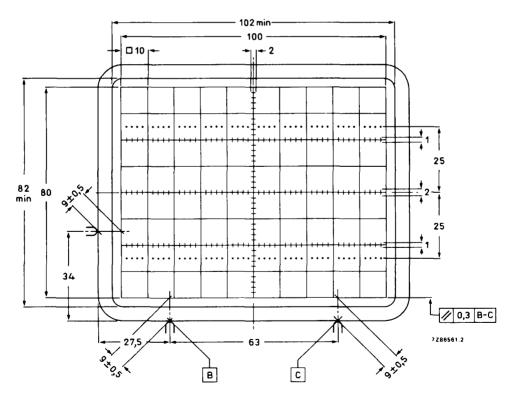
Front view of tube with internal graticule, type 93. The faceplate reference points are used for aligning the graticule with the faceplate.
